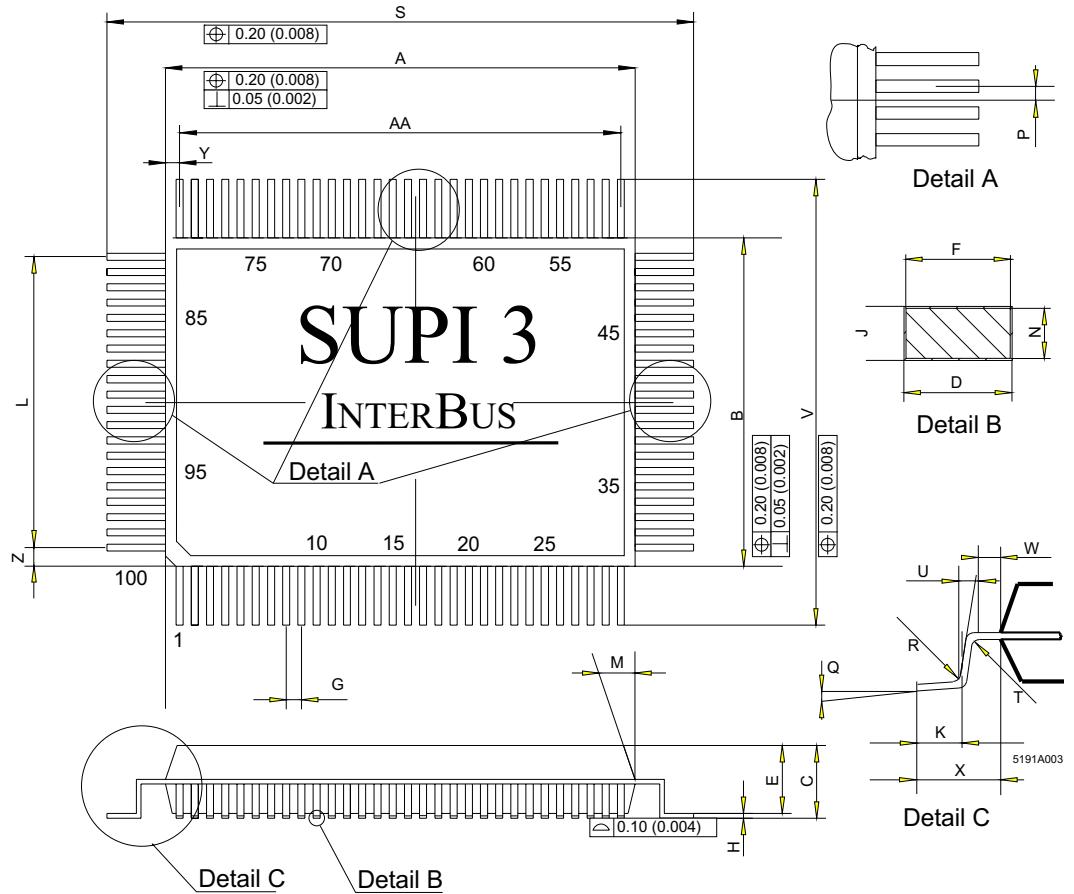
Mechanical dimensions of the QFP 100 housing (original dimension: millimeters)
